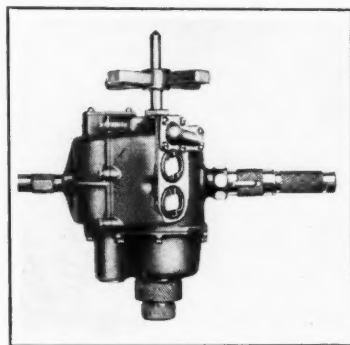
Pneumatic Drill Having Drilling Capacities up to 2 1/4 Inches
